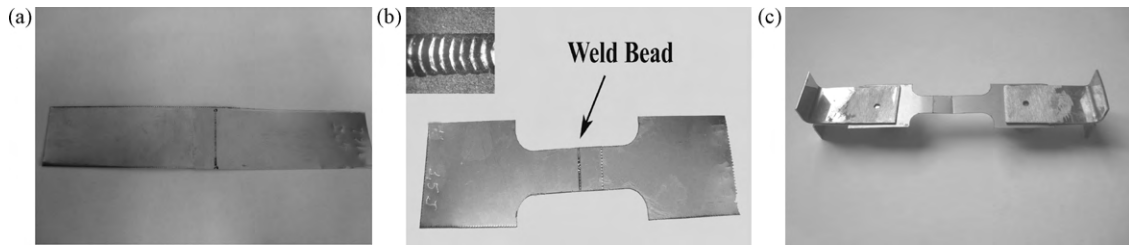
Top view of welded specimen with 1.5J pulse energy (a), an external shape of tensile shear test (b) and specimen prepared for the tensile shear test (c).
